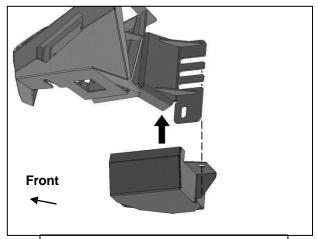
Driver/left side of bumper cover cut pictured. Push Edge Trim onto cover and reinstall the bumper cover
